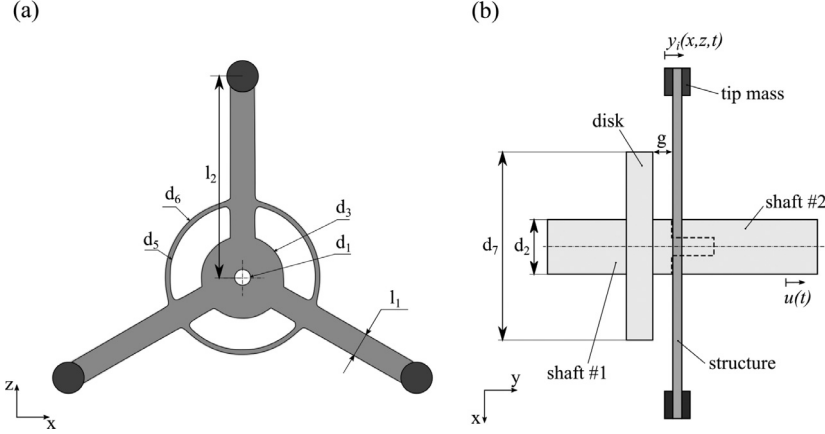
System with clearance nonlinearity. Panel (a) depicts a drawing of the mounted structure with attached tip masses on each beam. Panel (b) depicts a schematic drawing of the assembly consisting of the structure clamped by the shafts and the mounted disk.
